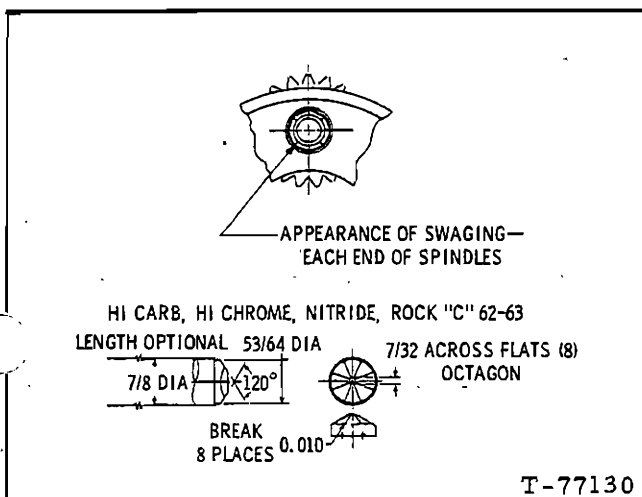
SWAGING TOOL FOR FORWARD, LOW- AND HIGH-RANGE PINION SPINDLES
